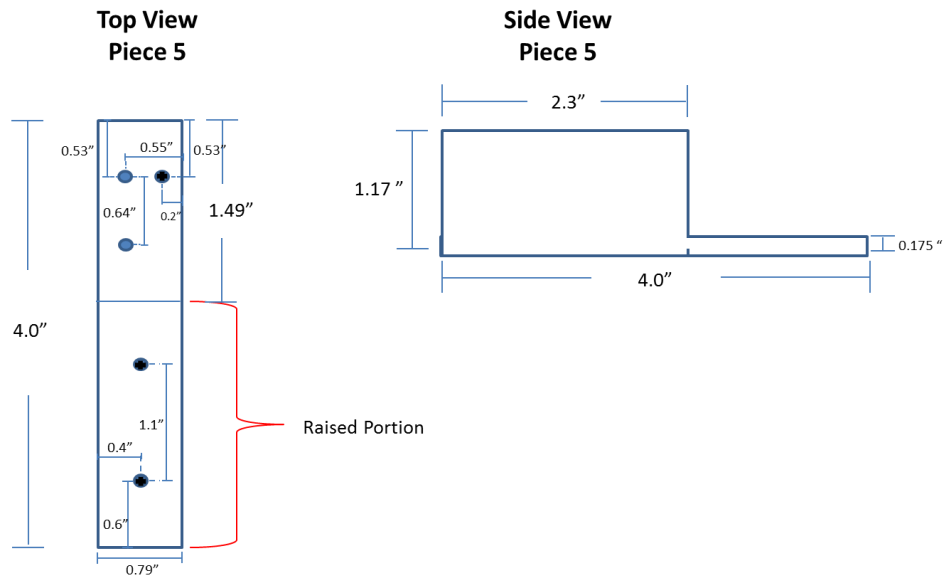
Schematic of piece 5 for motorized stage fixture.
